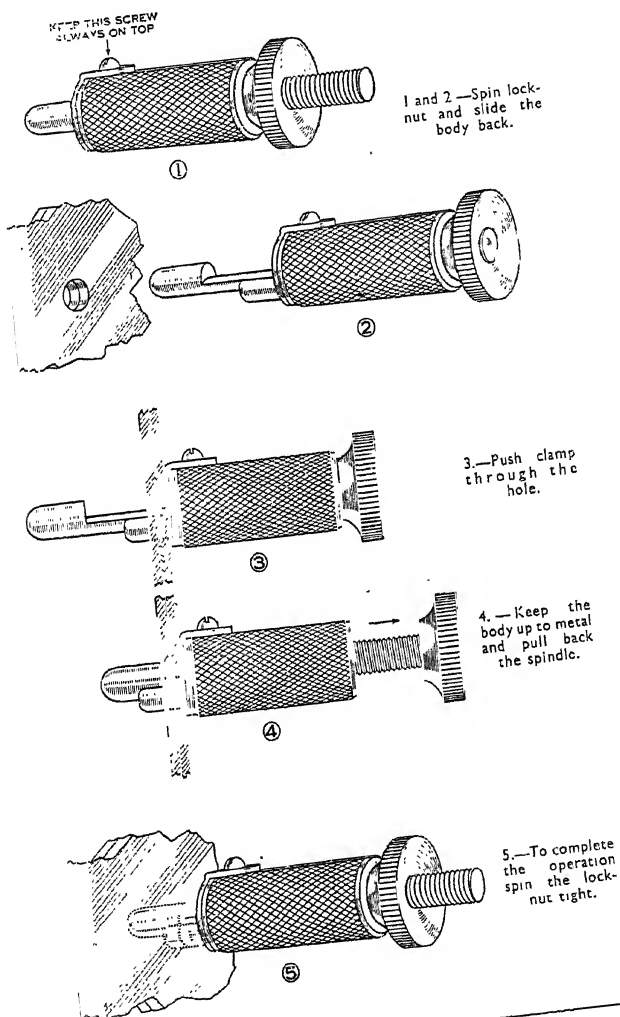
How the Myers riveting clamp is used, showing its locating and clamping action.
